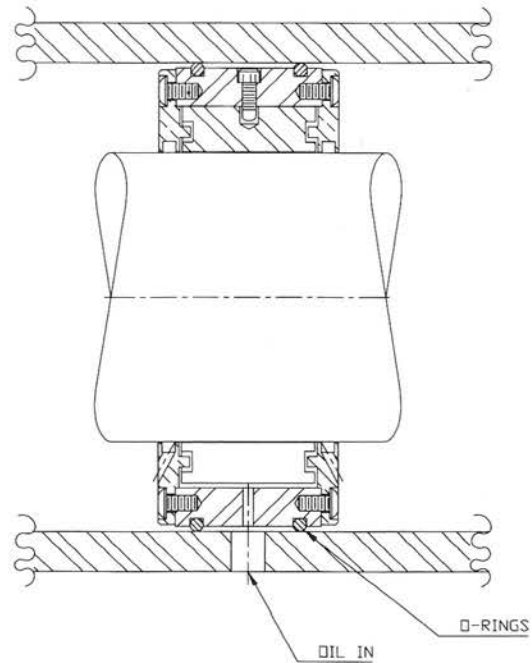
Combination Tilt Pad Bearing and O-Ring Supported Squeeze Film Damper.
